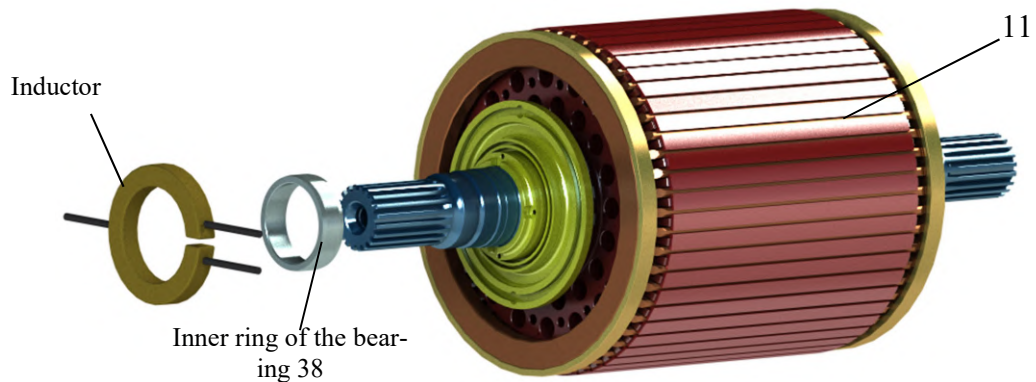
Installation of Inner Ring of Drive Side Bearing on the Rotor Shaft
